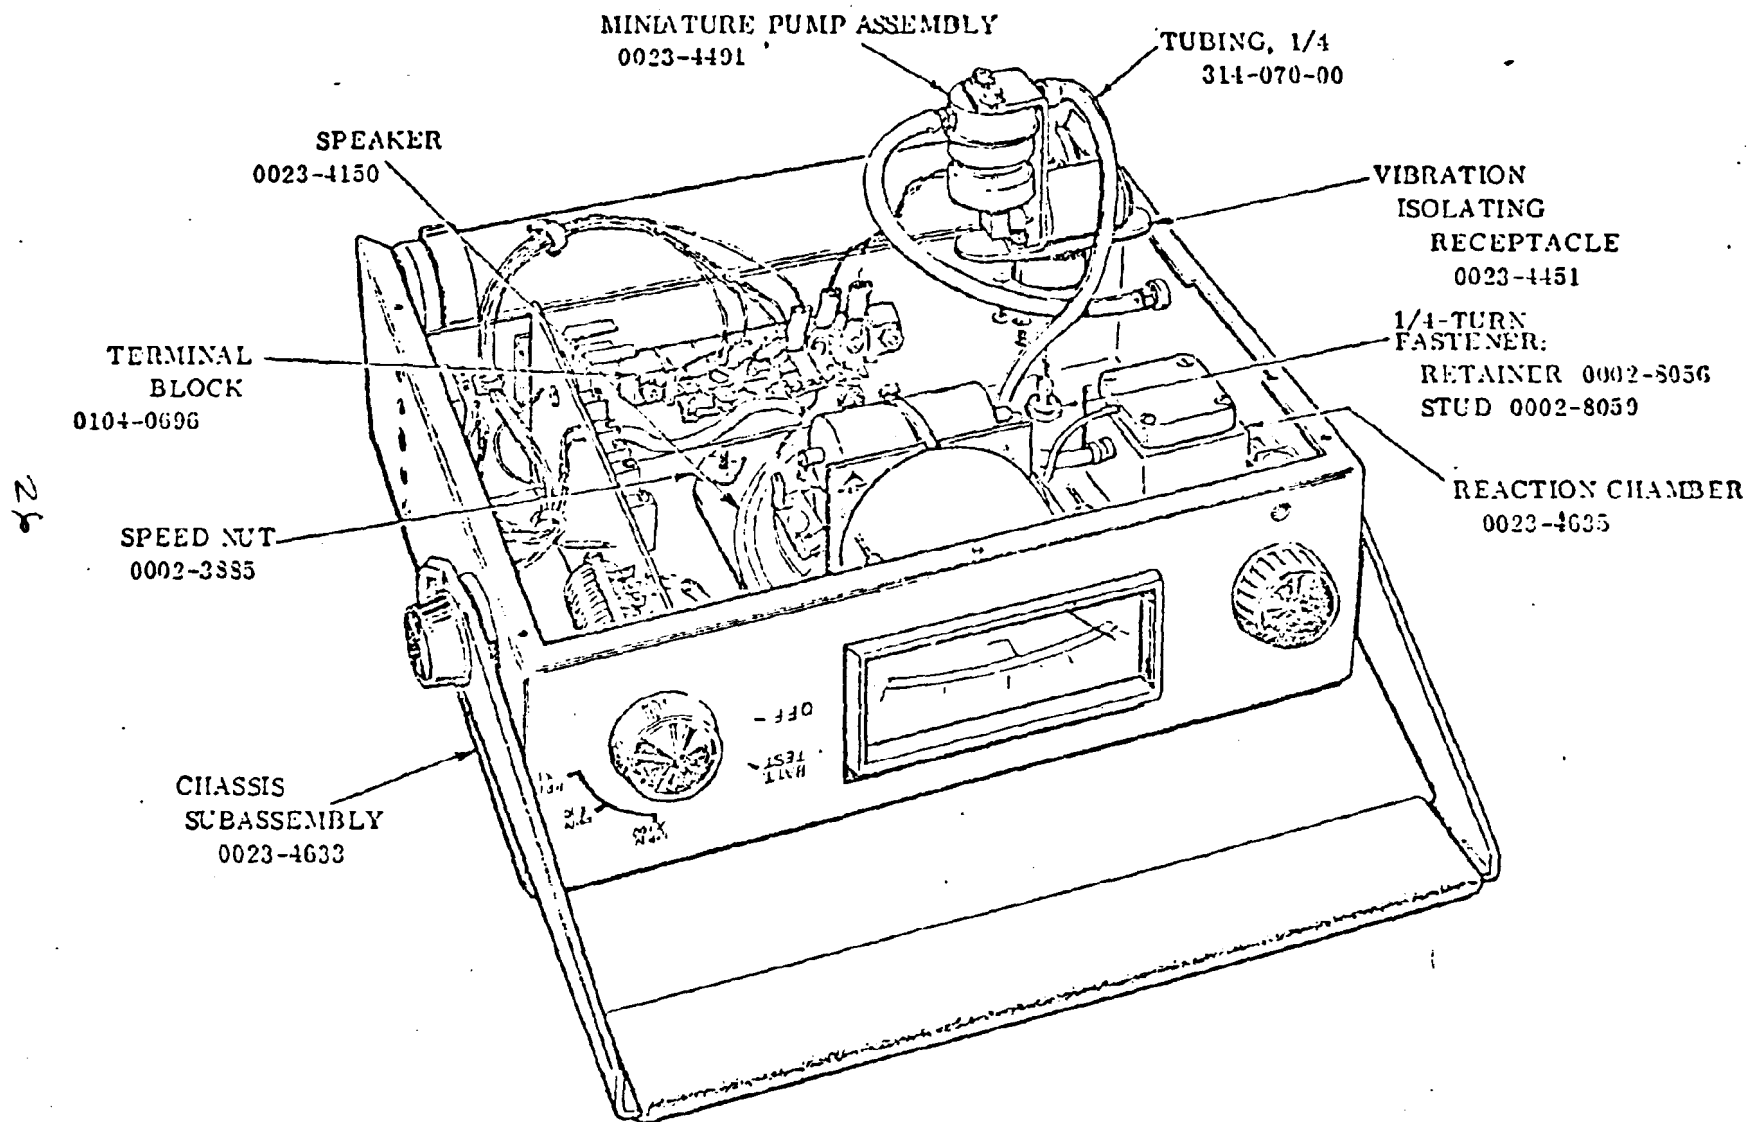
TLV Sniffer Chassis Subassembly Showing Miniature Pump Assembly in
